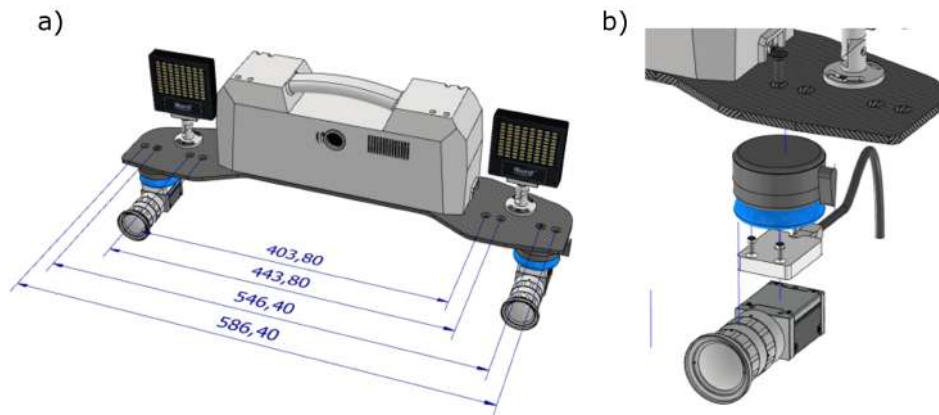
a) The base distances in MIS with four alternative base distances and b) the assembly of a single camera mount. The camera is fixed to the camera plate attached to MagicBalance ball head, which in turn is fixed to the carbon plate.
